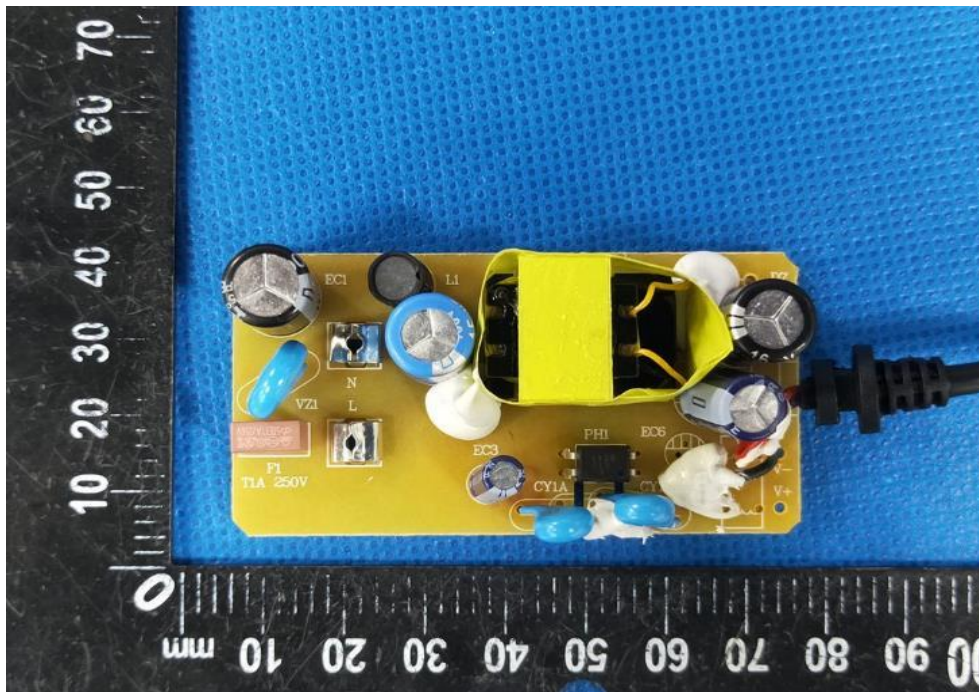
PCB top side view for model IVPxxxx-yyyyW (without D7, LF3)
